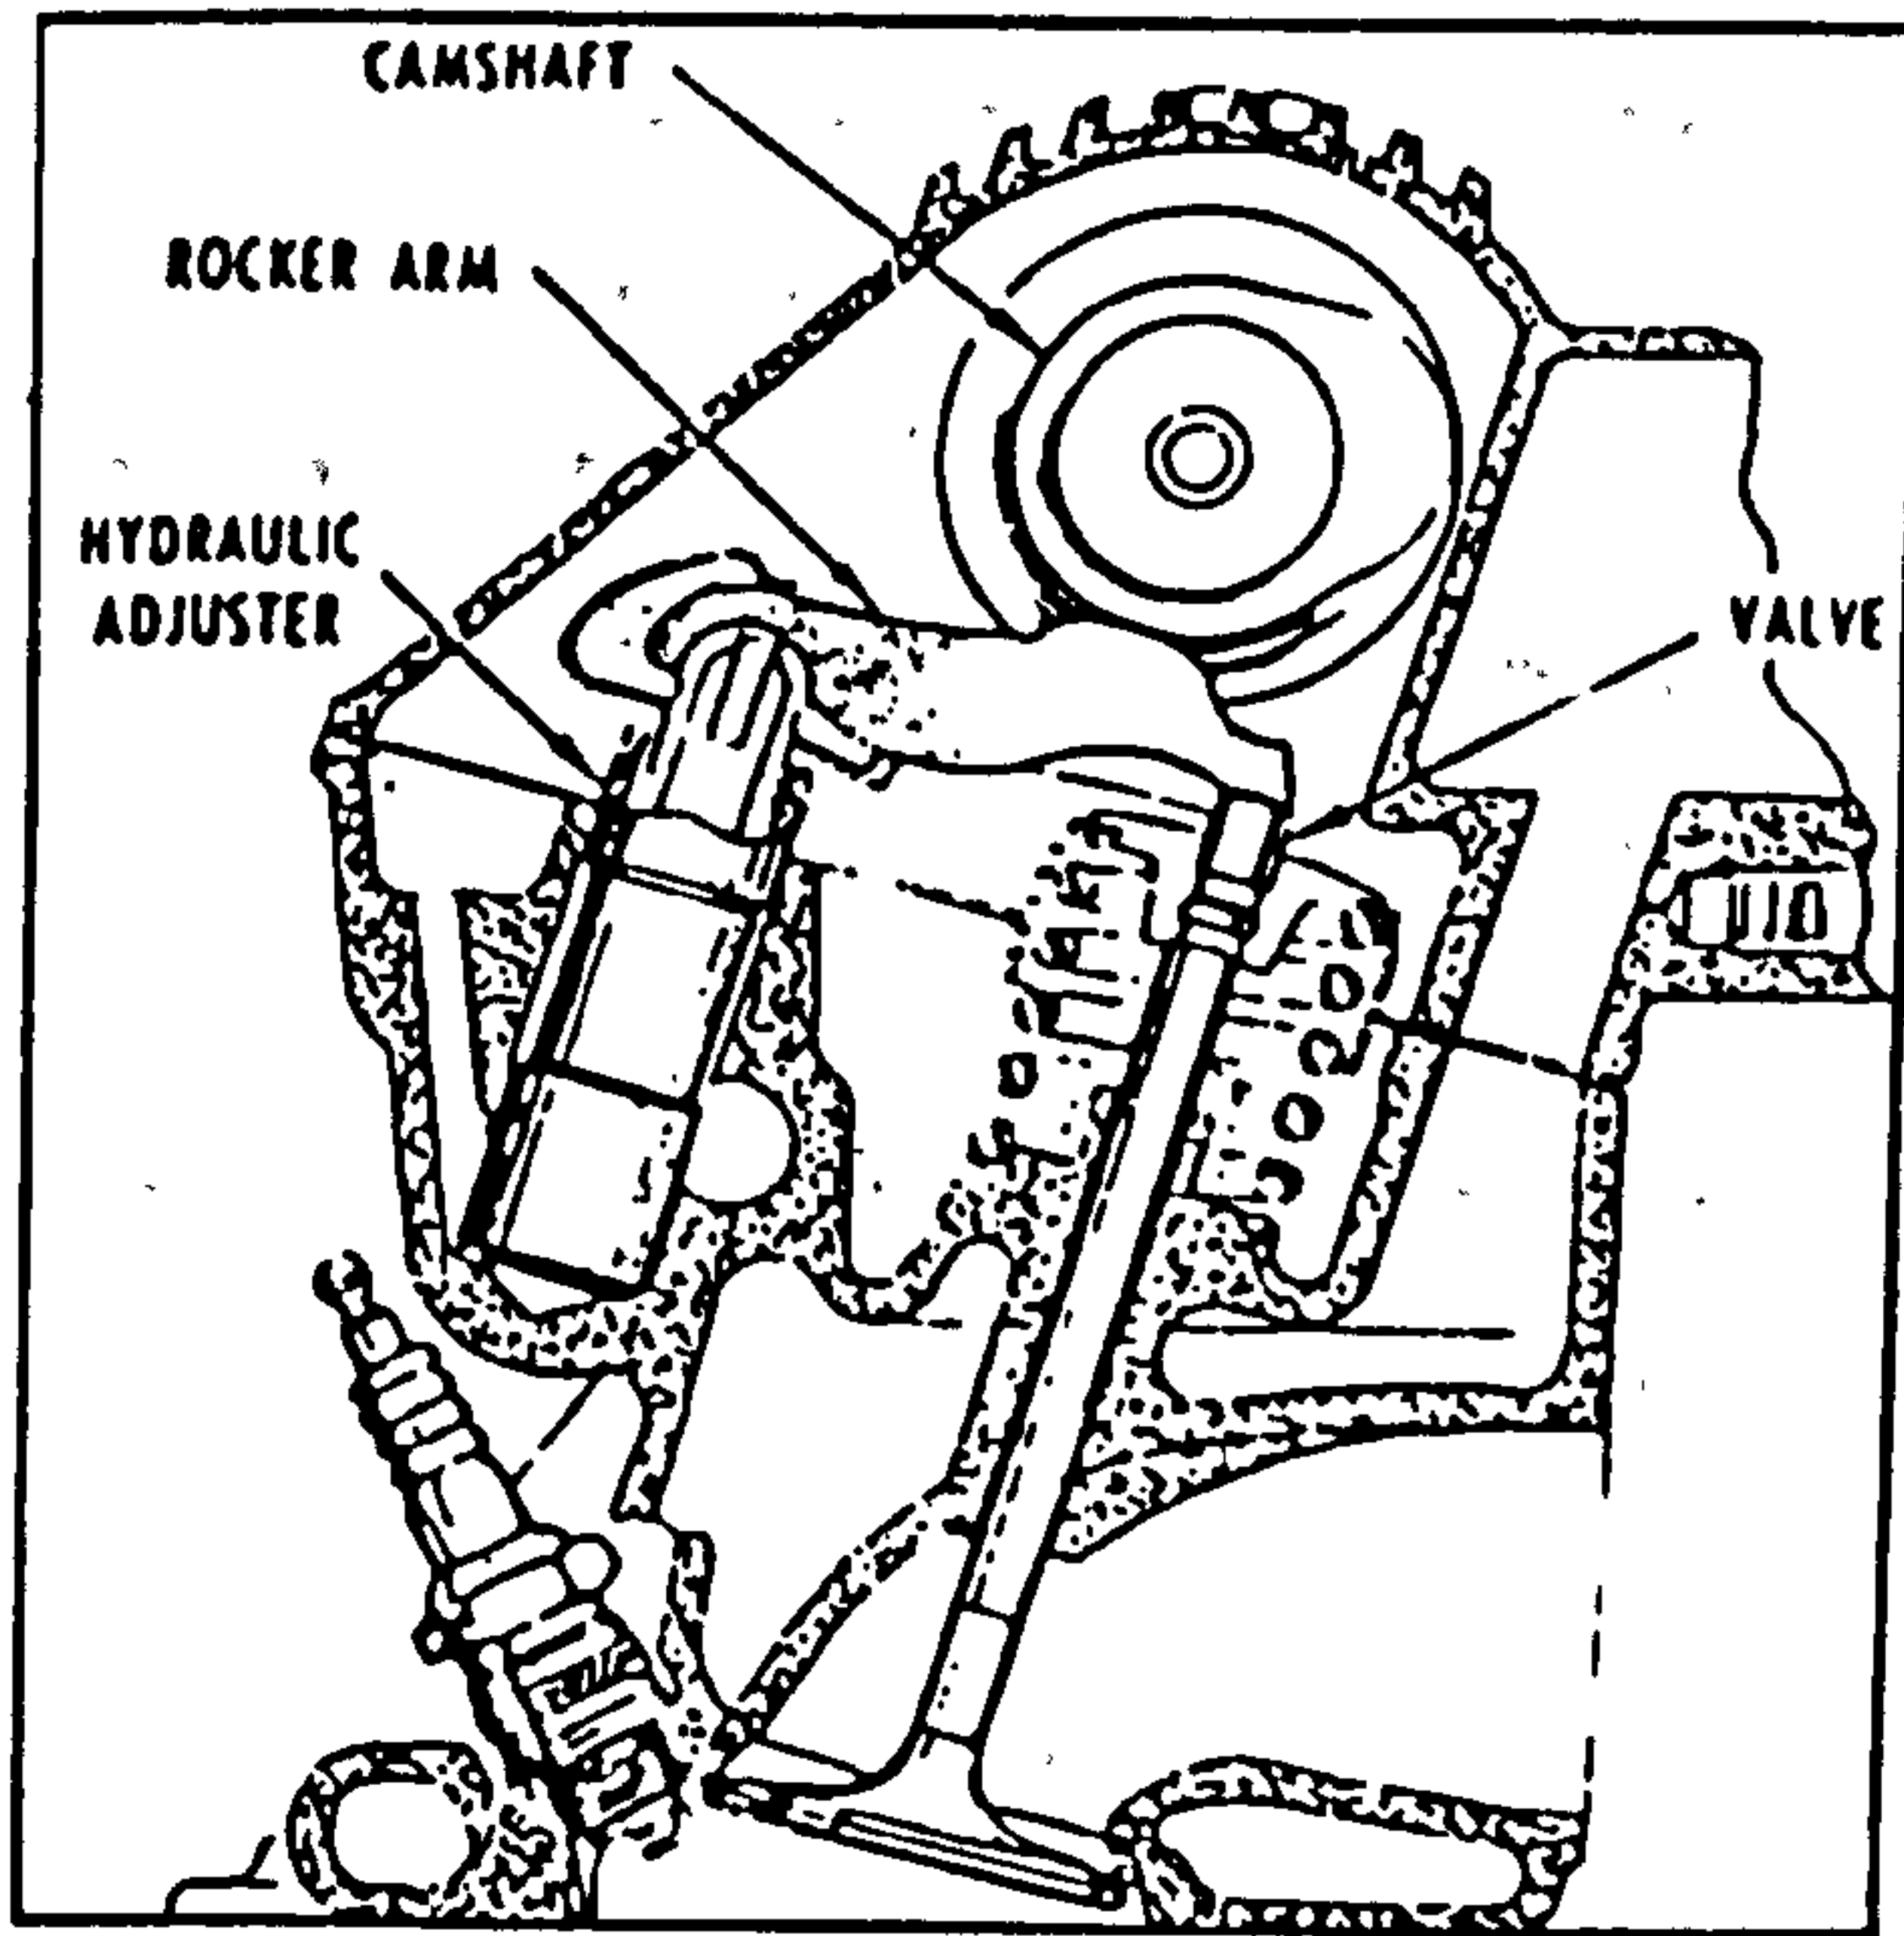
ROCKER ACTUATED OVERHEAD CAMSHAFT
